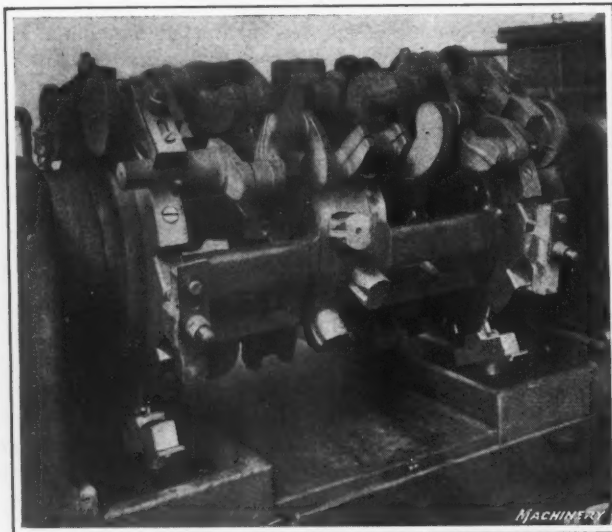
Fixture used for milling Ends of Six-throw Crankshafts
